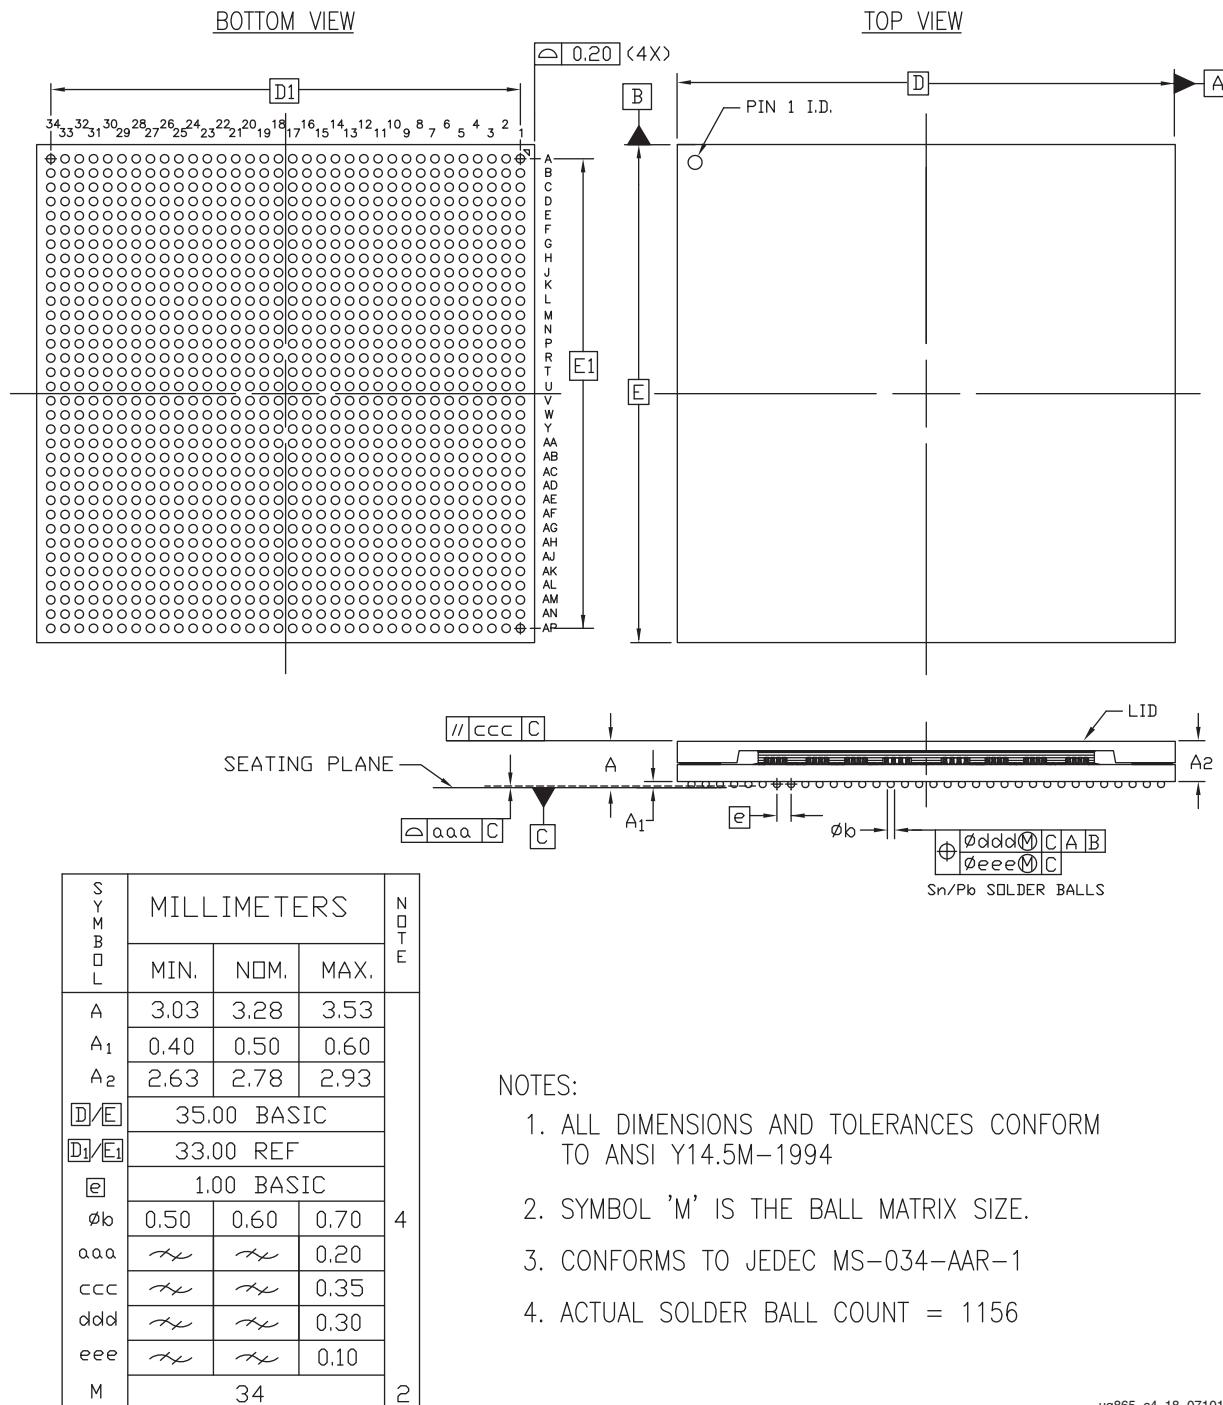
RF1156 Ruggedized Flip-Chip BGA Package Specifications for the XQ7Z100
